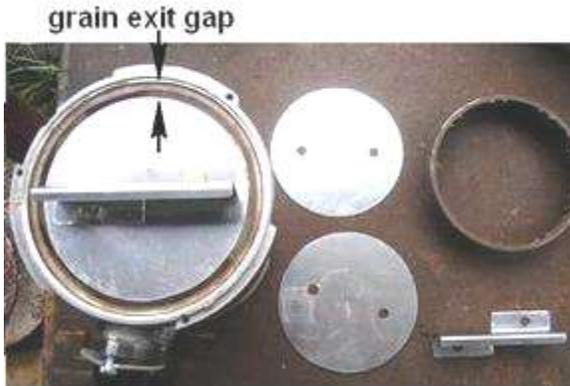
Cross-arm bolted on motor shaft and turntable and impeller blade bolted on cross-arm. The grain exit gap is the distance between turntable and inside wall of the garbage disposer below the grinding ring.
